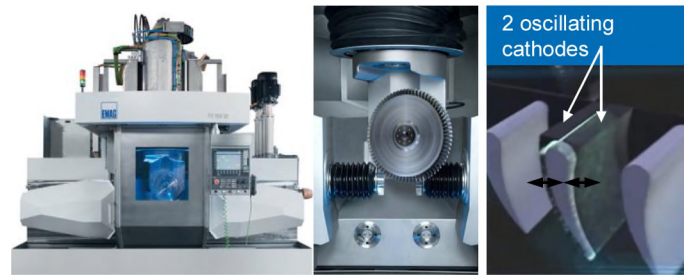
PECM machine tool for rough and finish machining of blisk geometries with 2 vibrating cathode tool electrodes [59,74].
